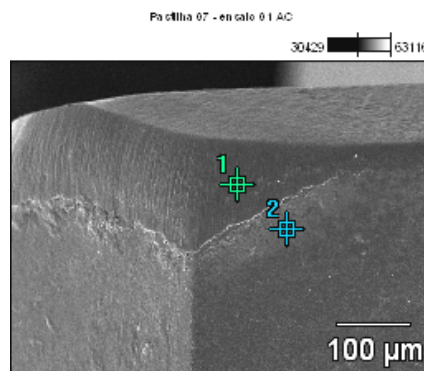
Ceramic tool cutting edge in the end of tool life - Workpiece 1 (x200) - MEV (20 kV)
